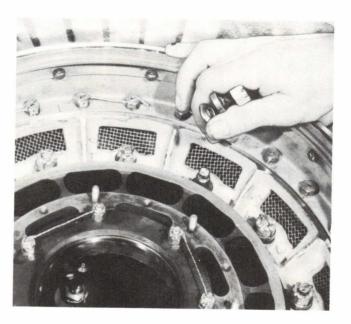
Removing the Ring and Tube Retainer Nuts, Washers, and Spacers
